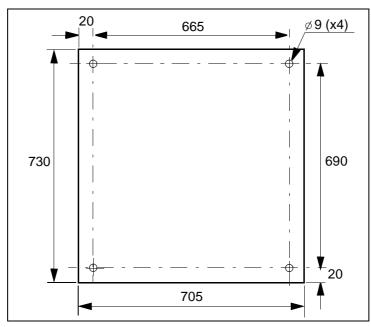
Mounting plate for mounting of equipment (dimensions in mm).
